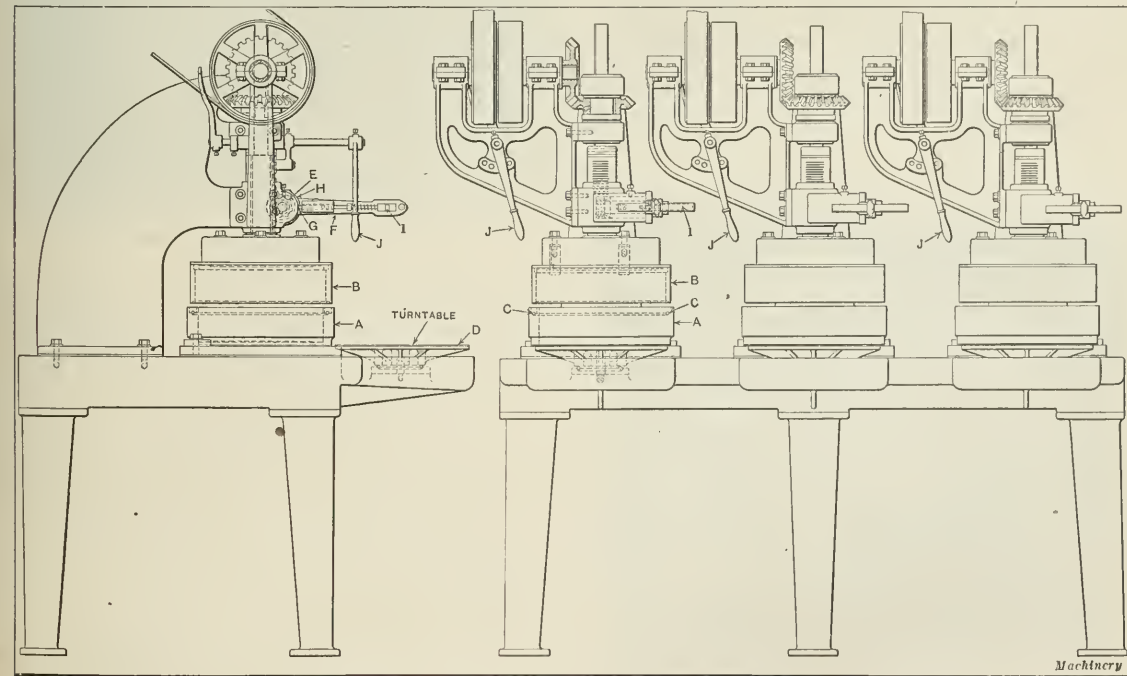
Side and Front Views of Oil-grinding Machine, illustrating Method of Operation
